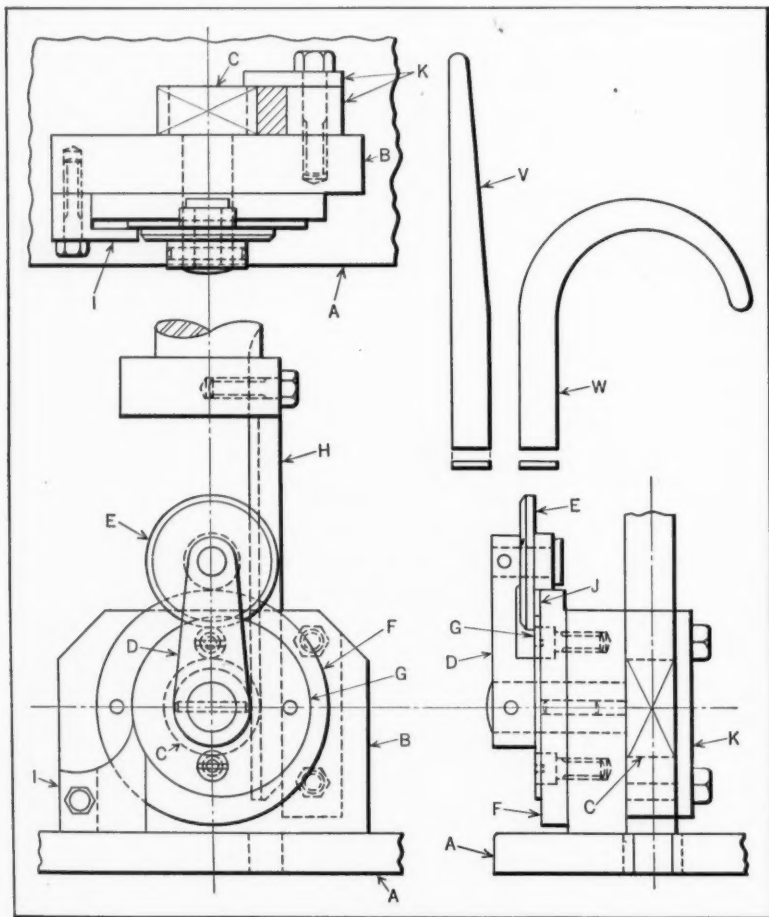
Fixture Used on Punch Press for Bending Straight Blank *V* to the Curved Shape Shown at *W
